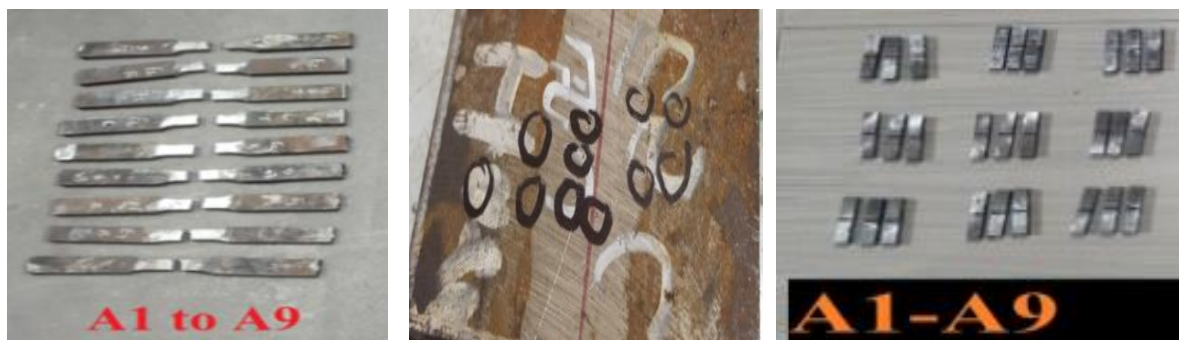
Tensile testing, hardness testing & impact testing of 9 welded plate
